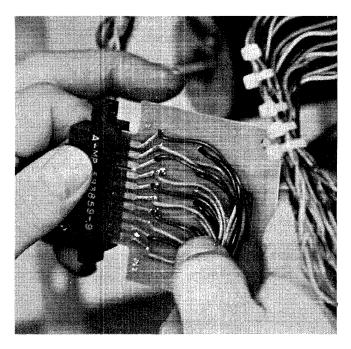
DRIVE EXTENDER CABLE ATTACHMENT
